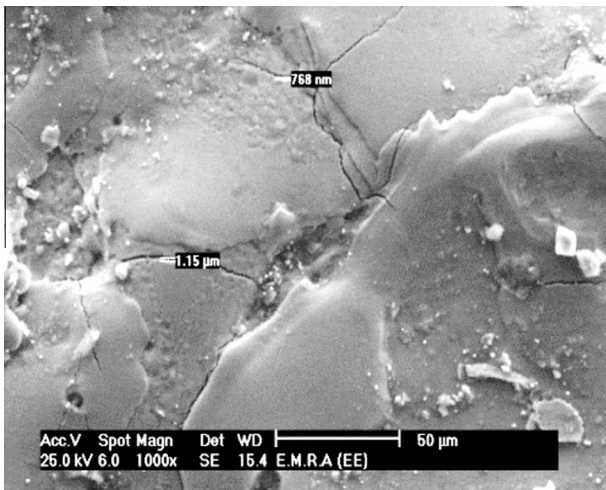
Surface cracks of DIN 1.2080 medium machining using POCO graphite EDMC-3 electrode.
